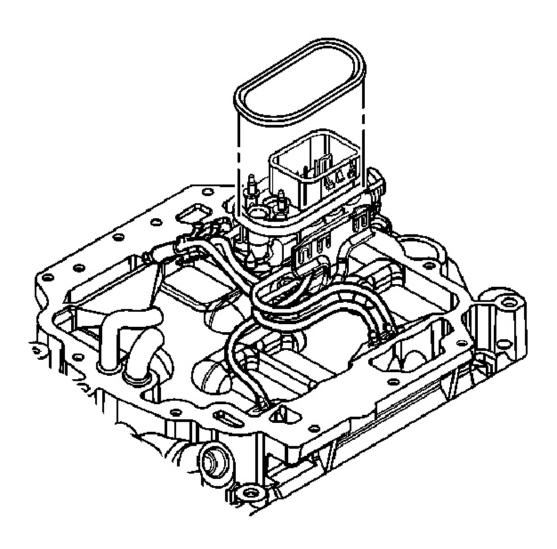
Fuel Meter Body O-Ring Seal Courtesy of GENERAL MOTORS CORP.
